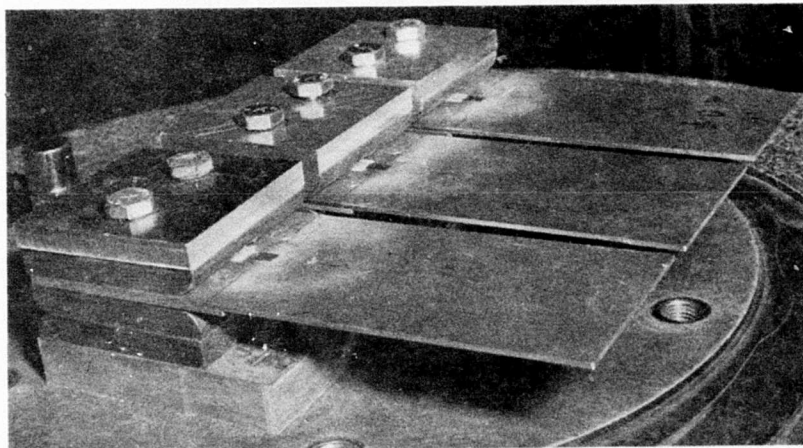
Three Low Frequency Test Specimens Mounted For Room Temperature Fatigue Testing
